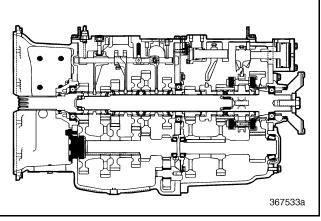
Front Countershaft Front Bearing Cover Component Locator (T313L/T318L Shown)
